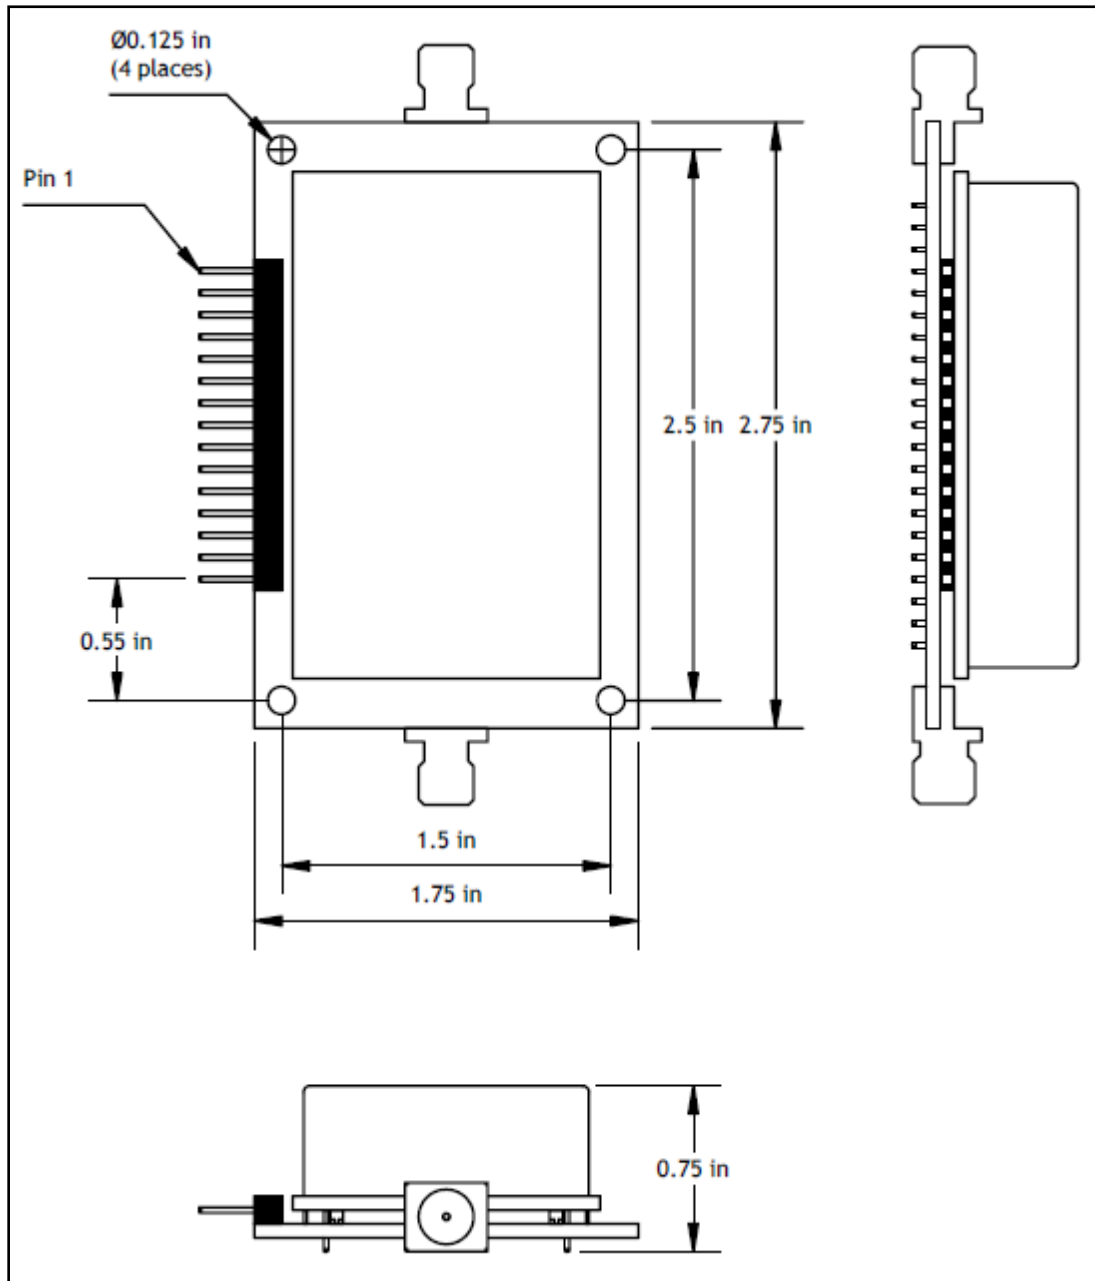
Connectorized SMA Package Dimensions, Top and Side Views
